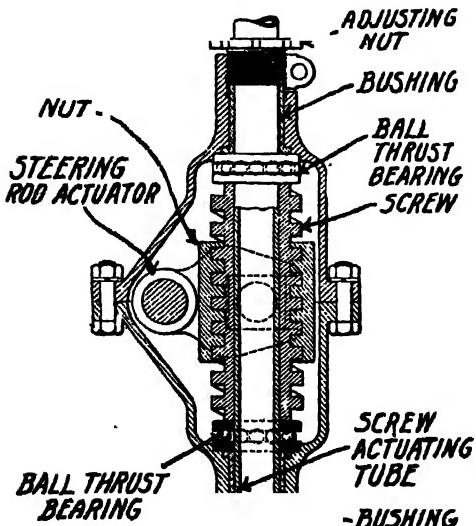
Internal Construction of Screw and Nut Reduction Steering Gear.
